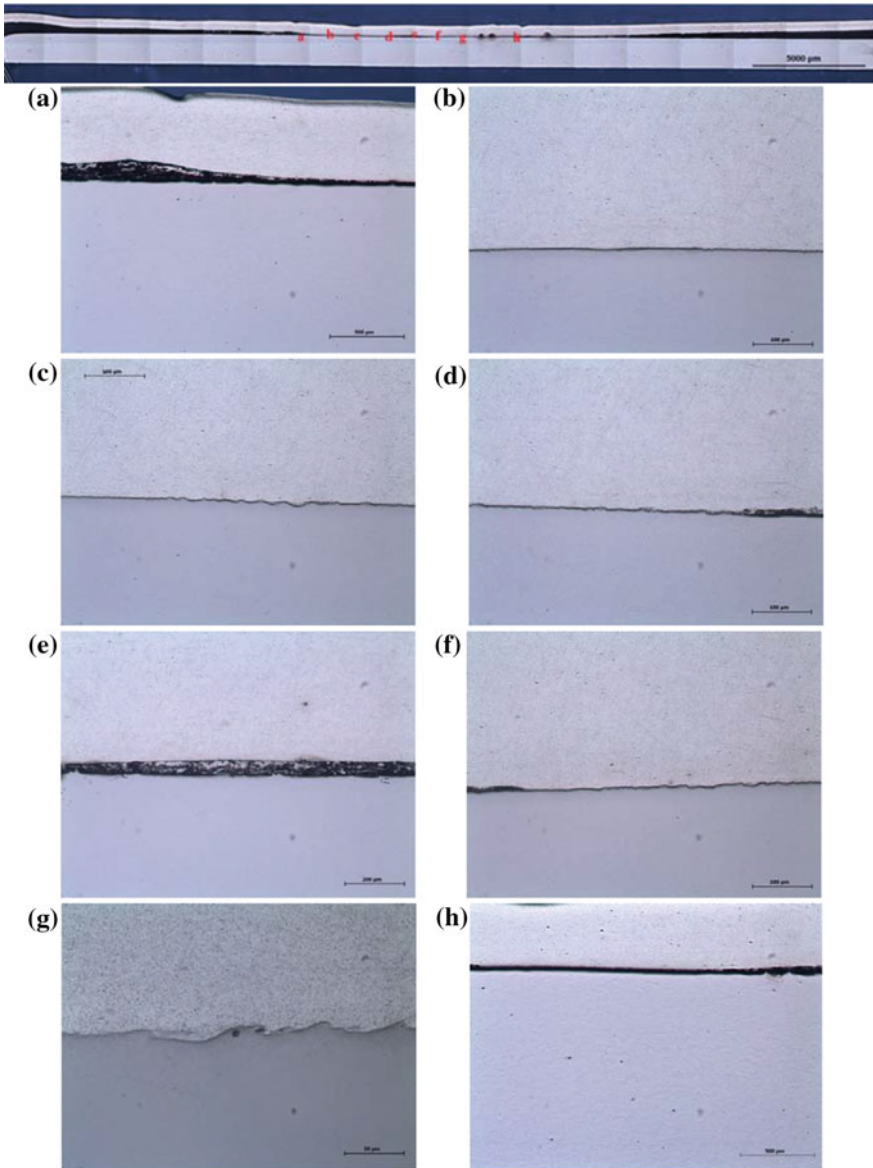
Macrograph of the weld cross section and details
